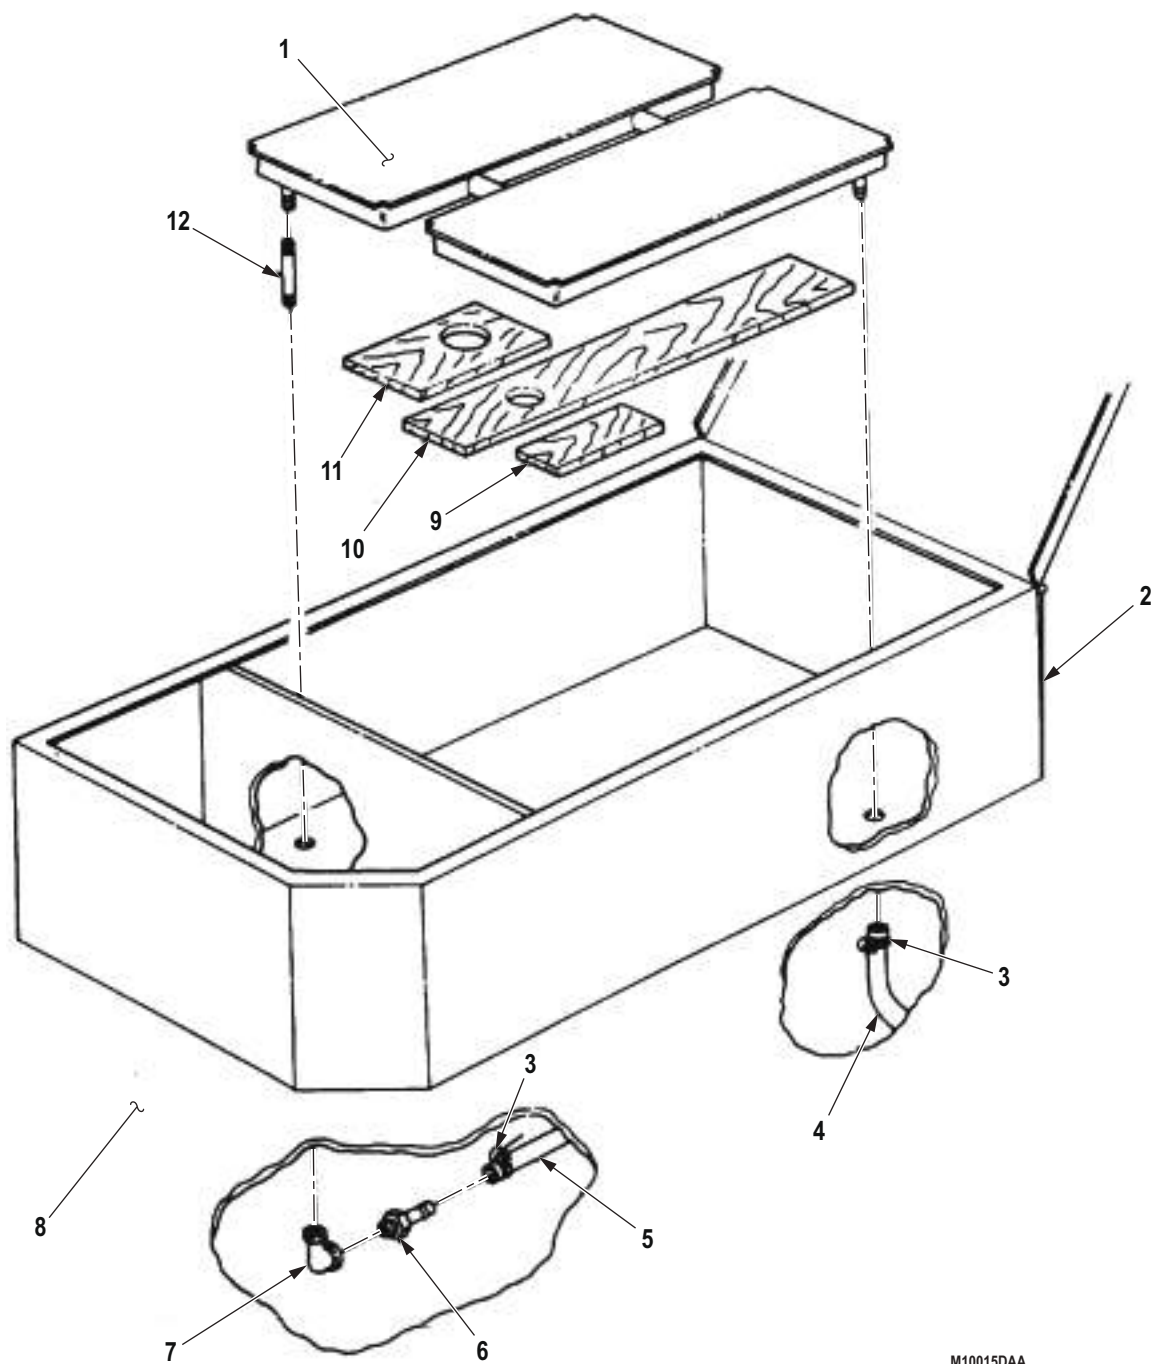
Engine Coolant Battery Box Heater Pad Removal.*END OF TASK
